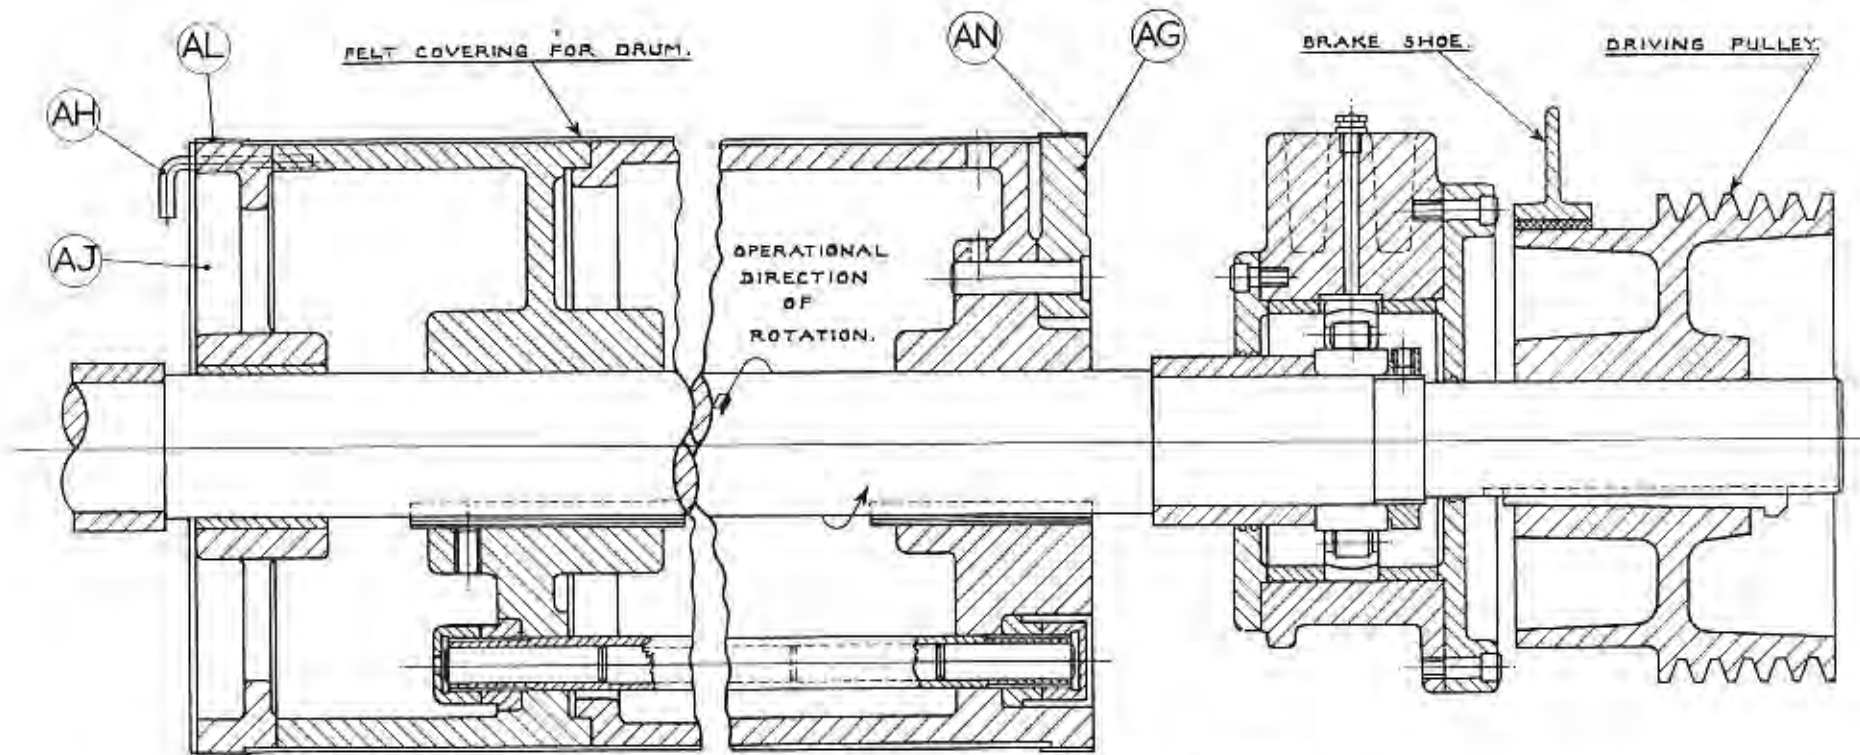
SECTION THROUGH SPIRAL DRUM AND DRIVING END OF SPINDLE.
